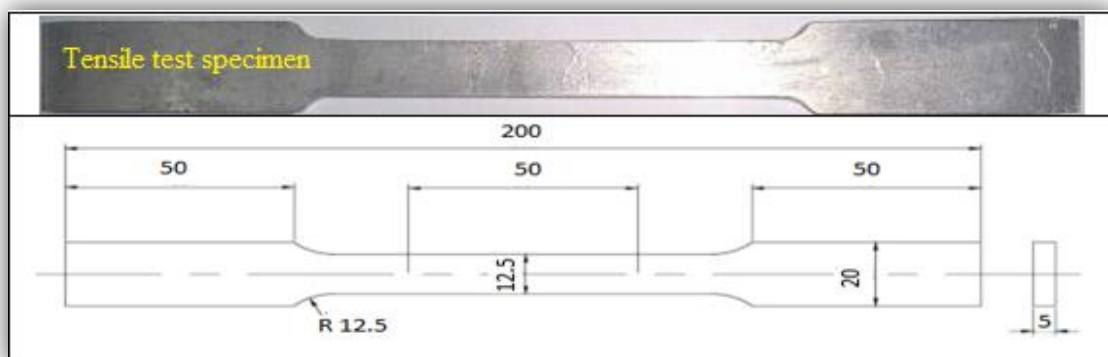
Tensile test specimen according to ASTM-B557M (all dimensions in mm).
